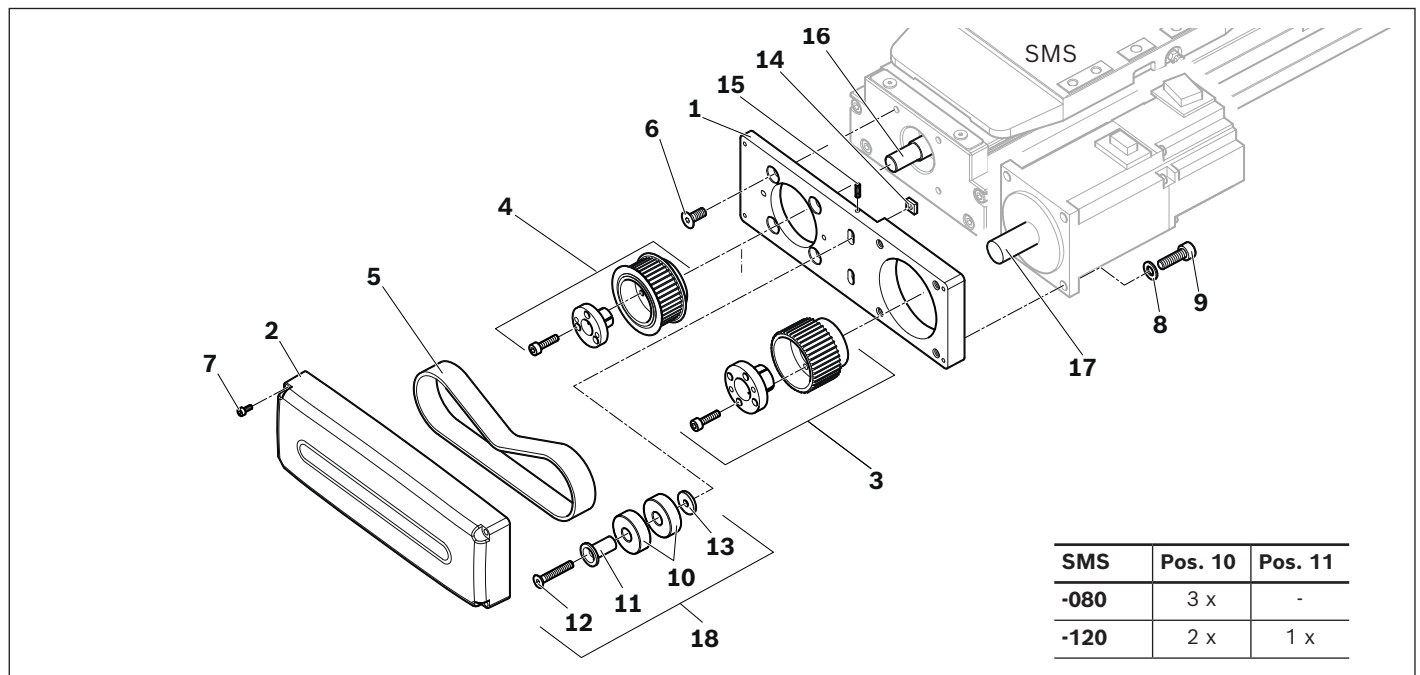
Mounting the SMS-080 / SMS-120 belt side drive
